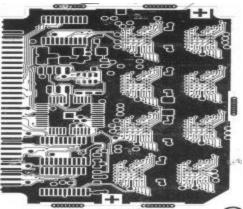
Example Layout / 100/120 µm Line/Space Standard Layout : 655 mm<sup>2</sup>
